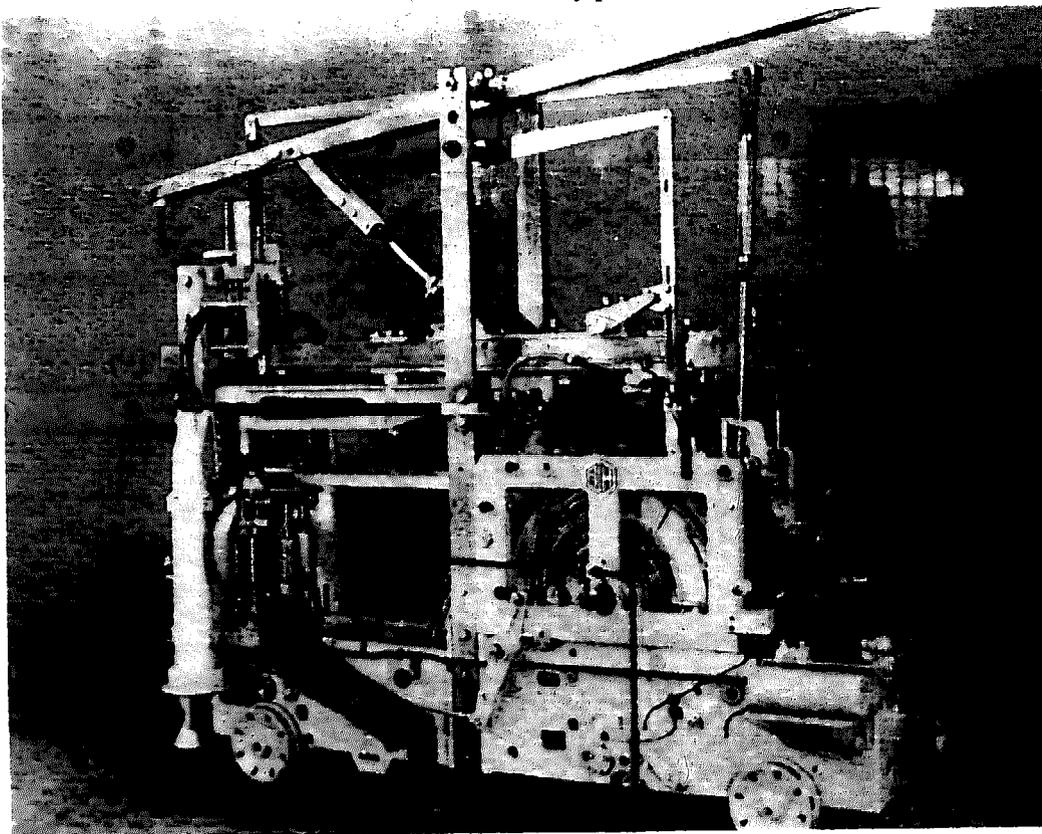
The Type 'F' suction moulding machine in use in Indonesia and (below) Type 'BM' machine.
